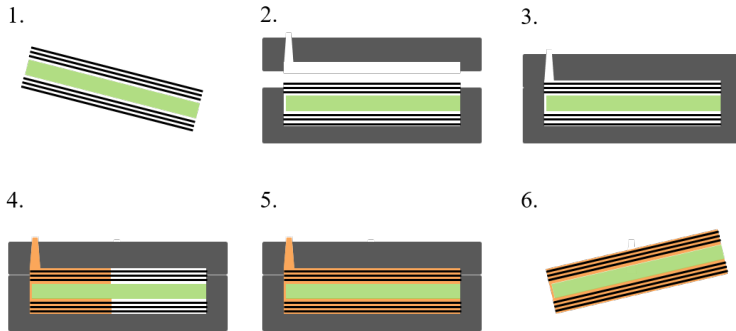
RTM process to manufacture sandwich parts with 6 steps; (1) Stacking of the preform; (2) Transfer to open mold; (3) Closing mold (and applying vacuum); (4) Injection; (5) Curing; (6) Demolding
